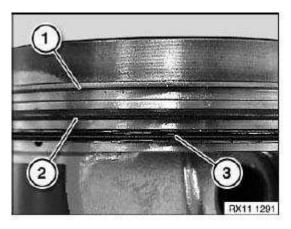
Piston Rings Assembly And Components Courtesy of BMW OF NORTH AMERICA, INC.
